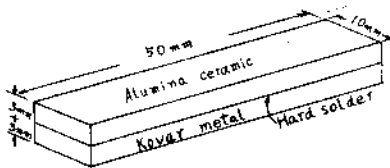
Ceramic-to-metal seal used as sample for measurement
